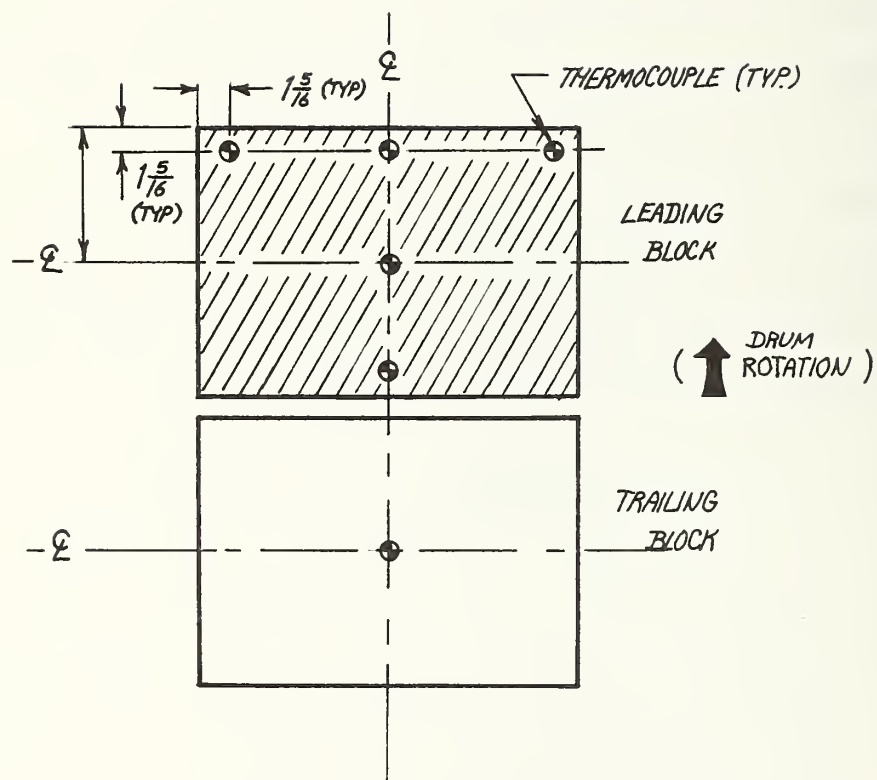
BRAKE BLOCK THERMOCOUPLE LOCATIONS (MINIMUM NO. OF TCS)
